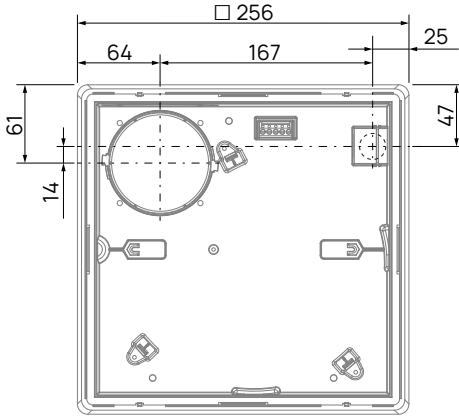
Dimensioned drawing – surface-mounted Taris extractor fan cable passage
